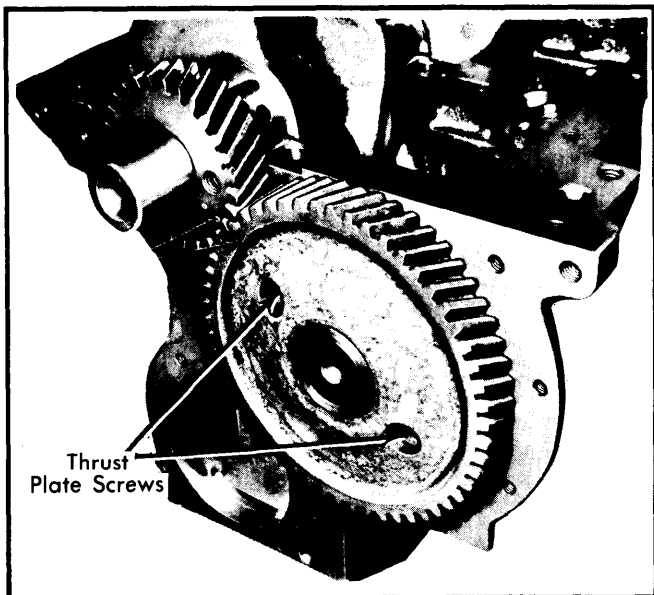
View Showing Location of Camshaft Thrust Plate Screws
